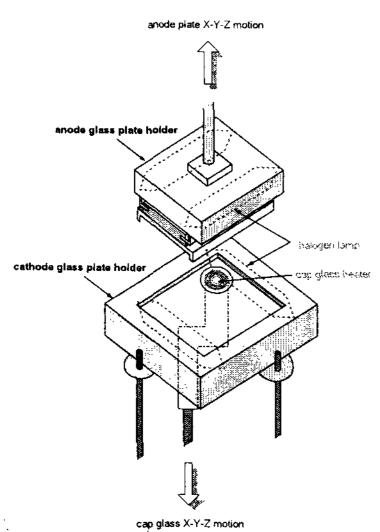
Schematic diagram showing the heating and holding stages of the vacuum in-line sealing system.
